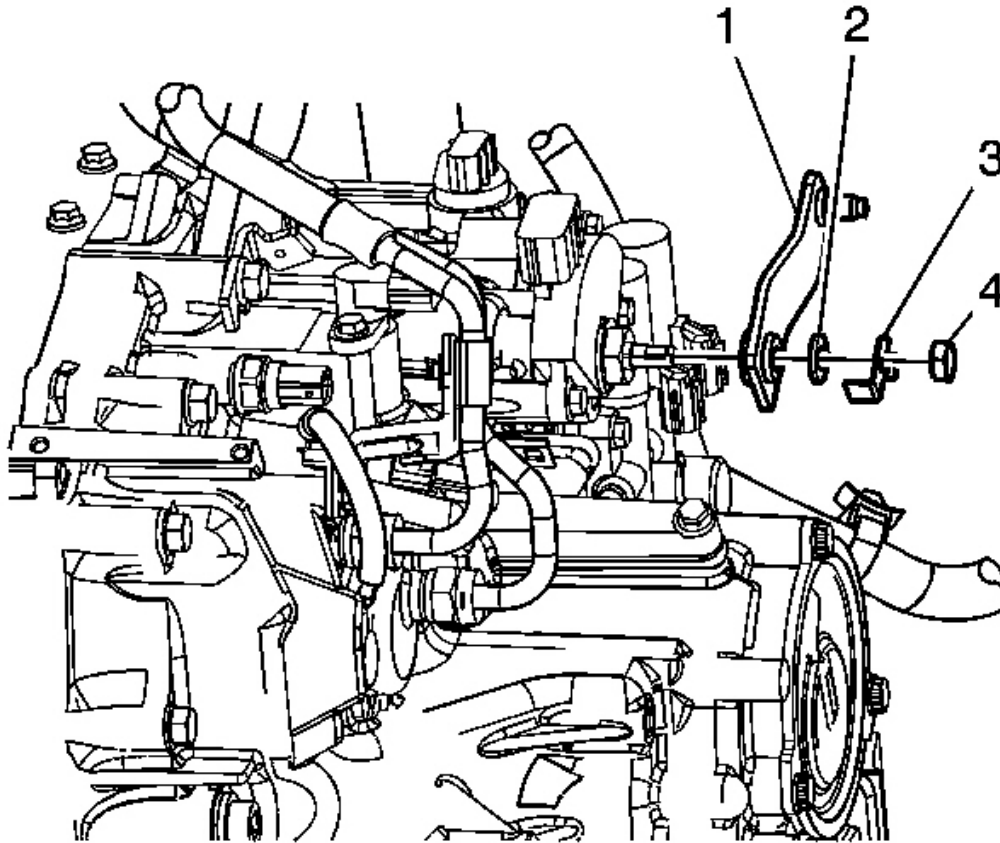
Transaxle Range Switch Lever Nut, Lock Nut, Washer & Lever
